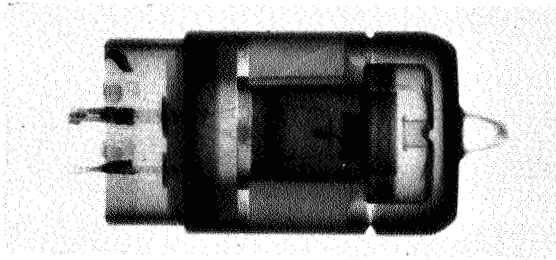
Radiograph of Electron Gun Design No. 3 taken after impact tests. Assembly damage included cracked heater ceramic; deformed cathode support cone; and chipped anode ceramic.
